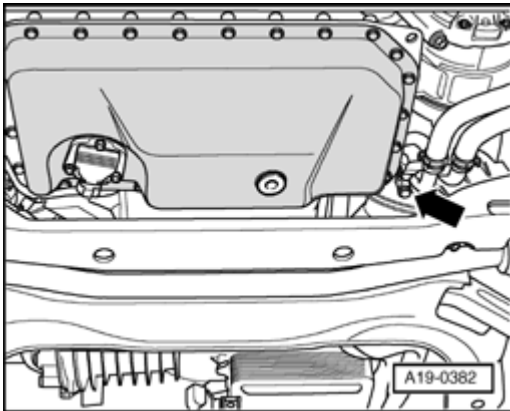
Installing Drain Plug At Oil Filter Bracket With New Gasket In Engine At Left
